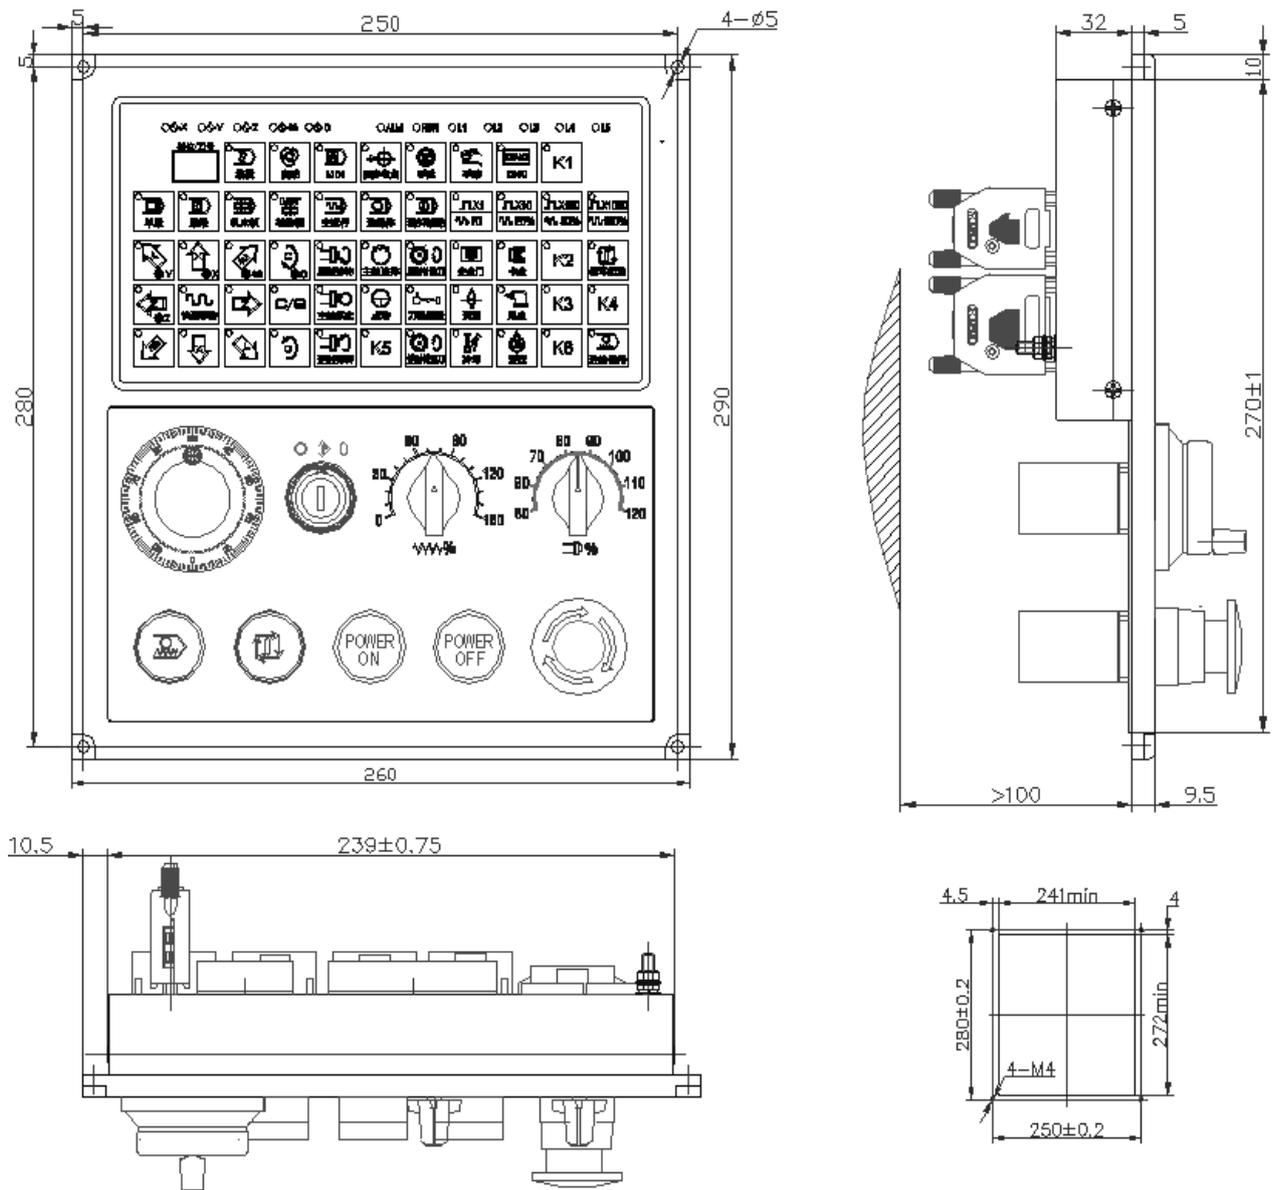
The installation dimension of machine operation panel MPU-08E
